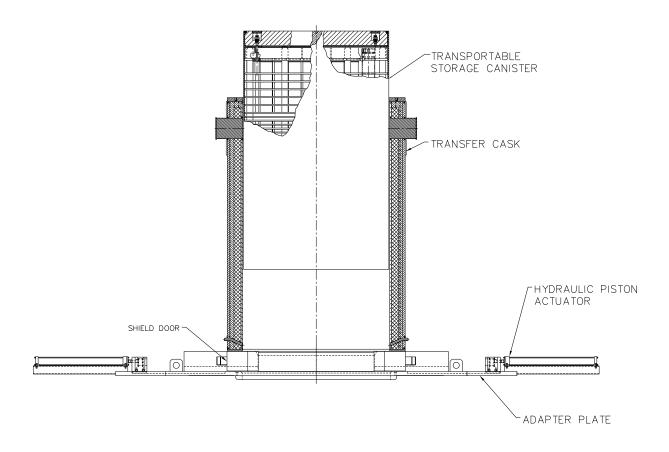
MPC-LACBWR Transfer Cask and Canister Arrangement
